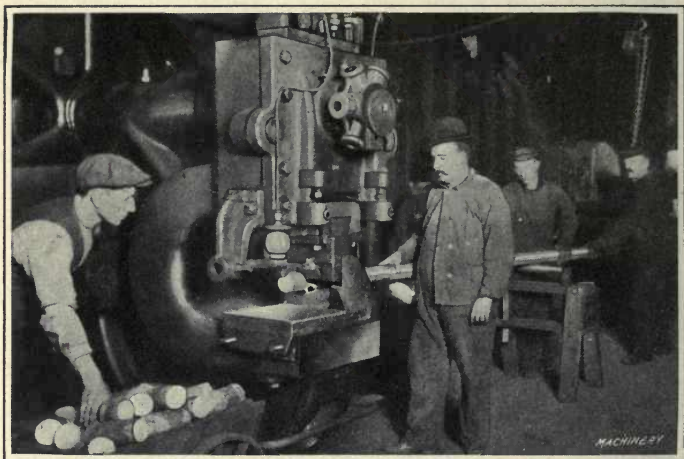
Cutting off Blanks for Russian 3-inch High-explosive Shell Forgings in a Shearing Press
